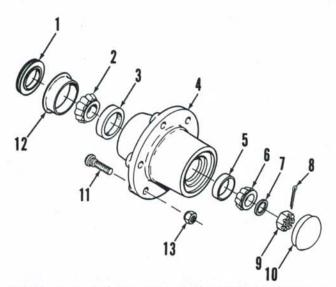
Exploded view of front wheel hub and bearings used on all two-wheel drive models equipped with adjustable front axles.
